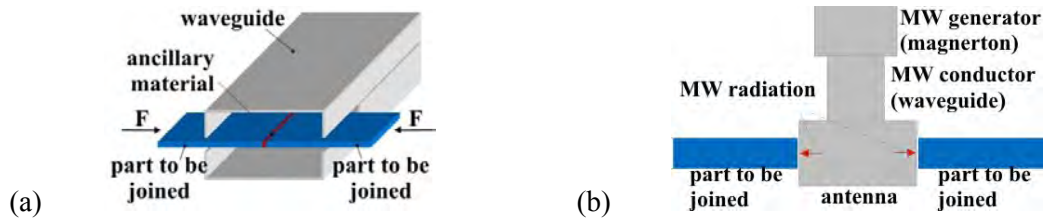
System for microwave welding with (a) susceptible material and (b) without auxiliary welding material
